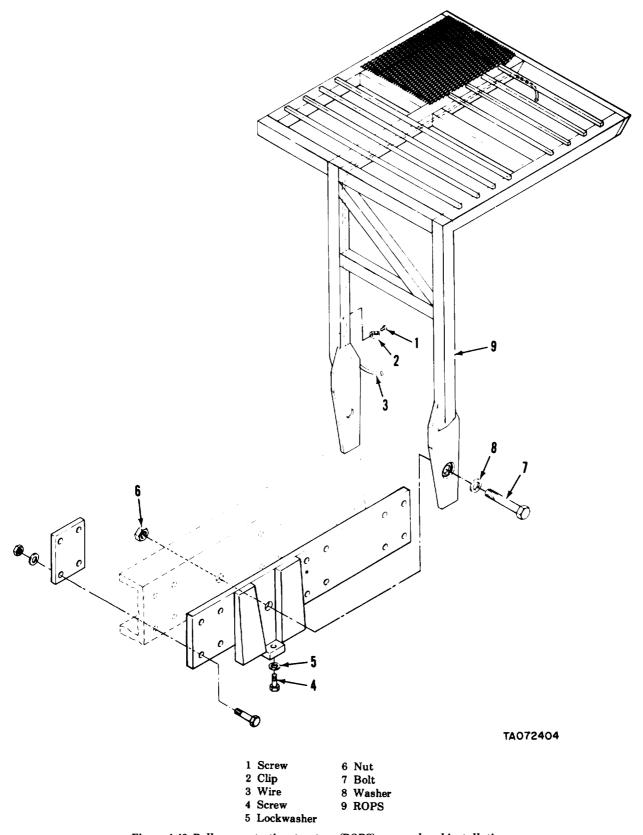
Roll overprotective structure (ROPS), removal and installation.
